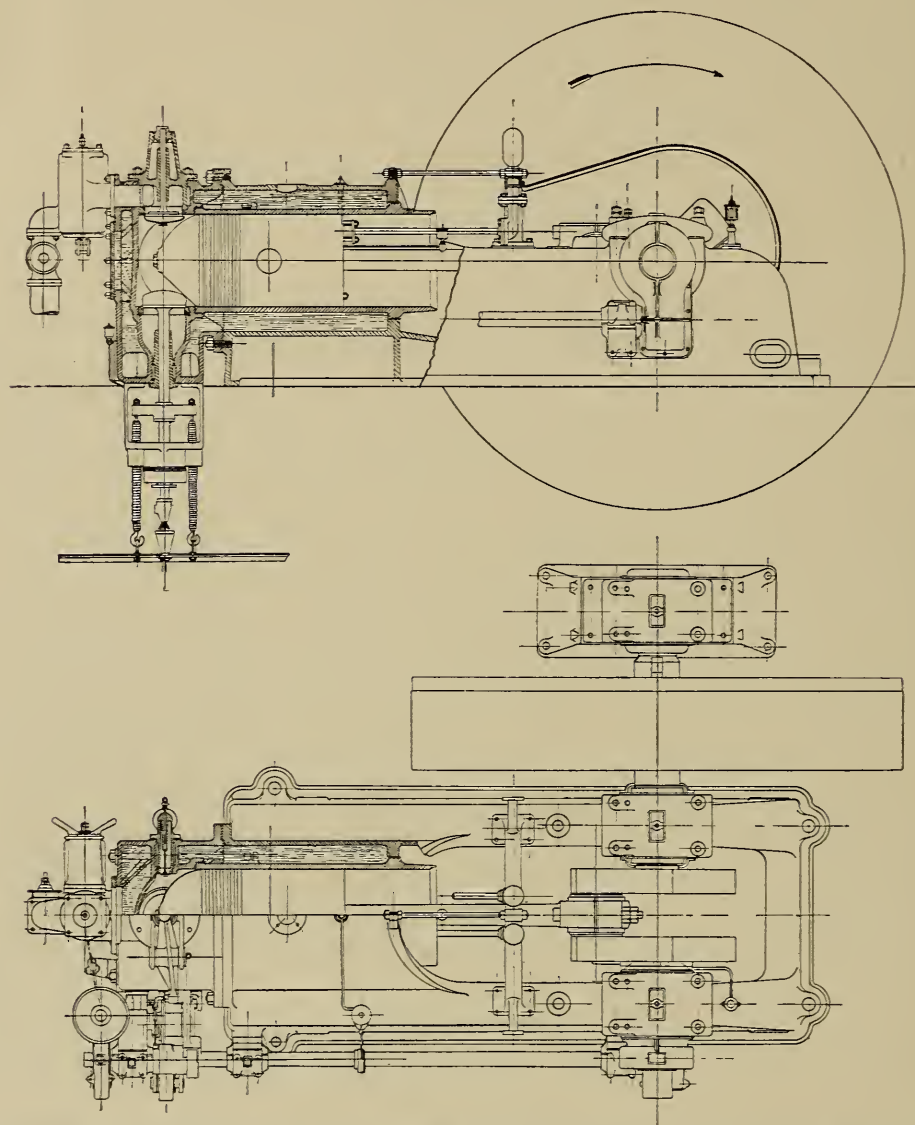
Campbell Gas Engine. Note the disposition of the inlet and exhaust valves, and the water cooling arrangements. On the plan at the lower side is seen the half-time-shaft.
